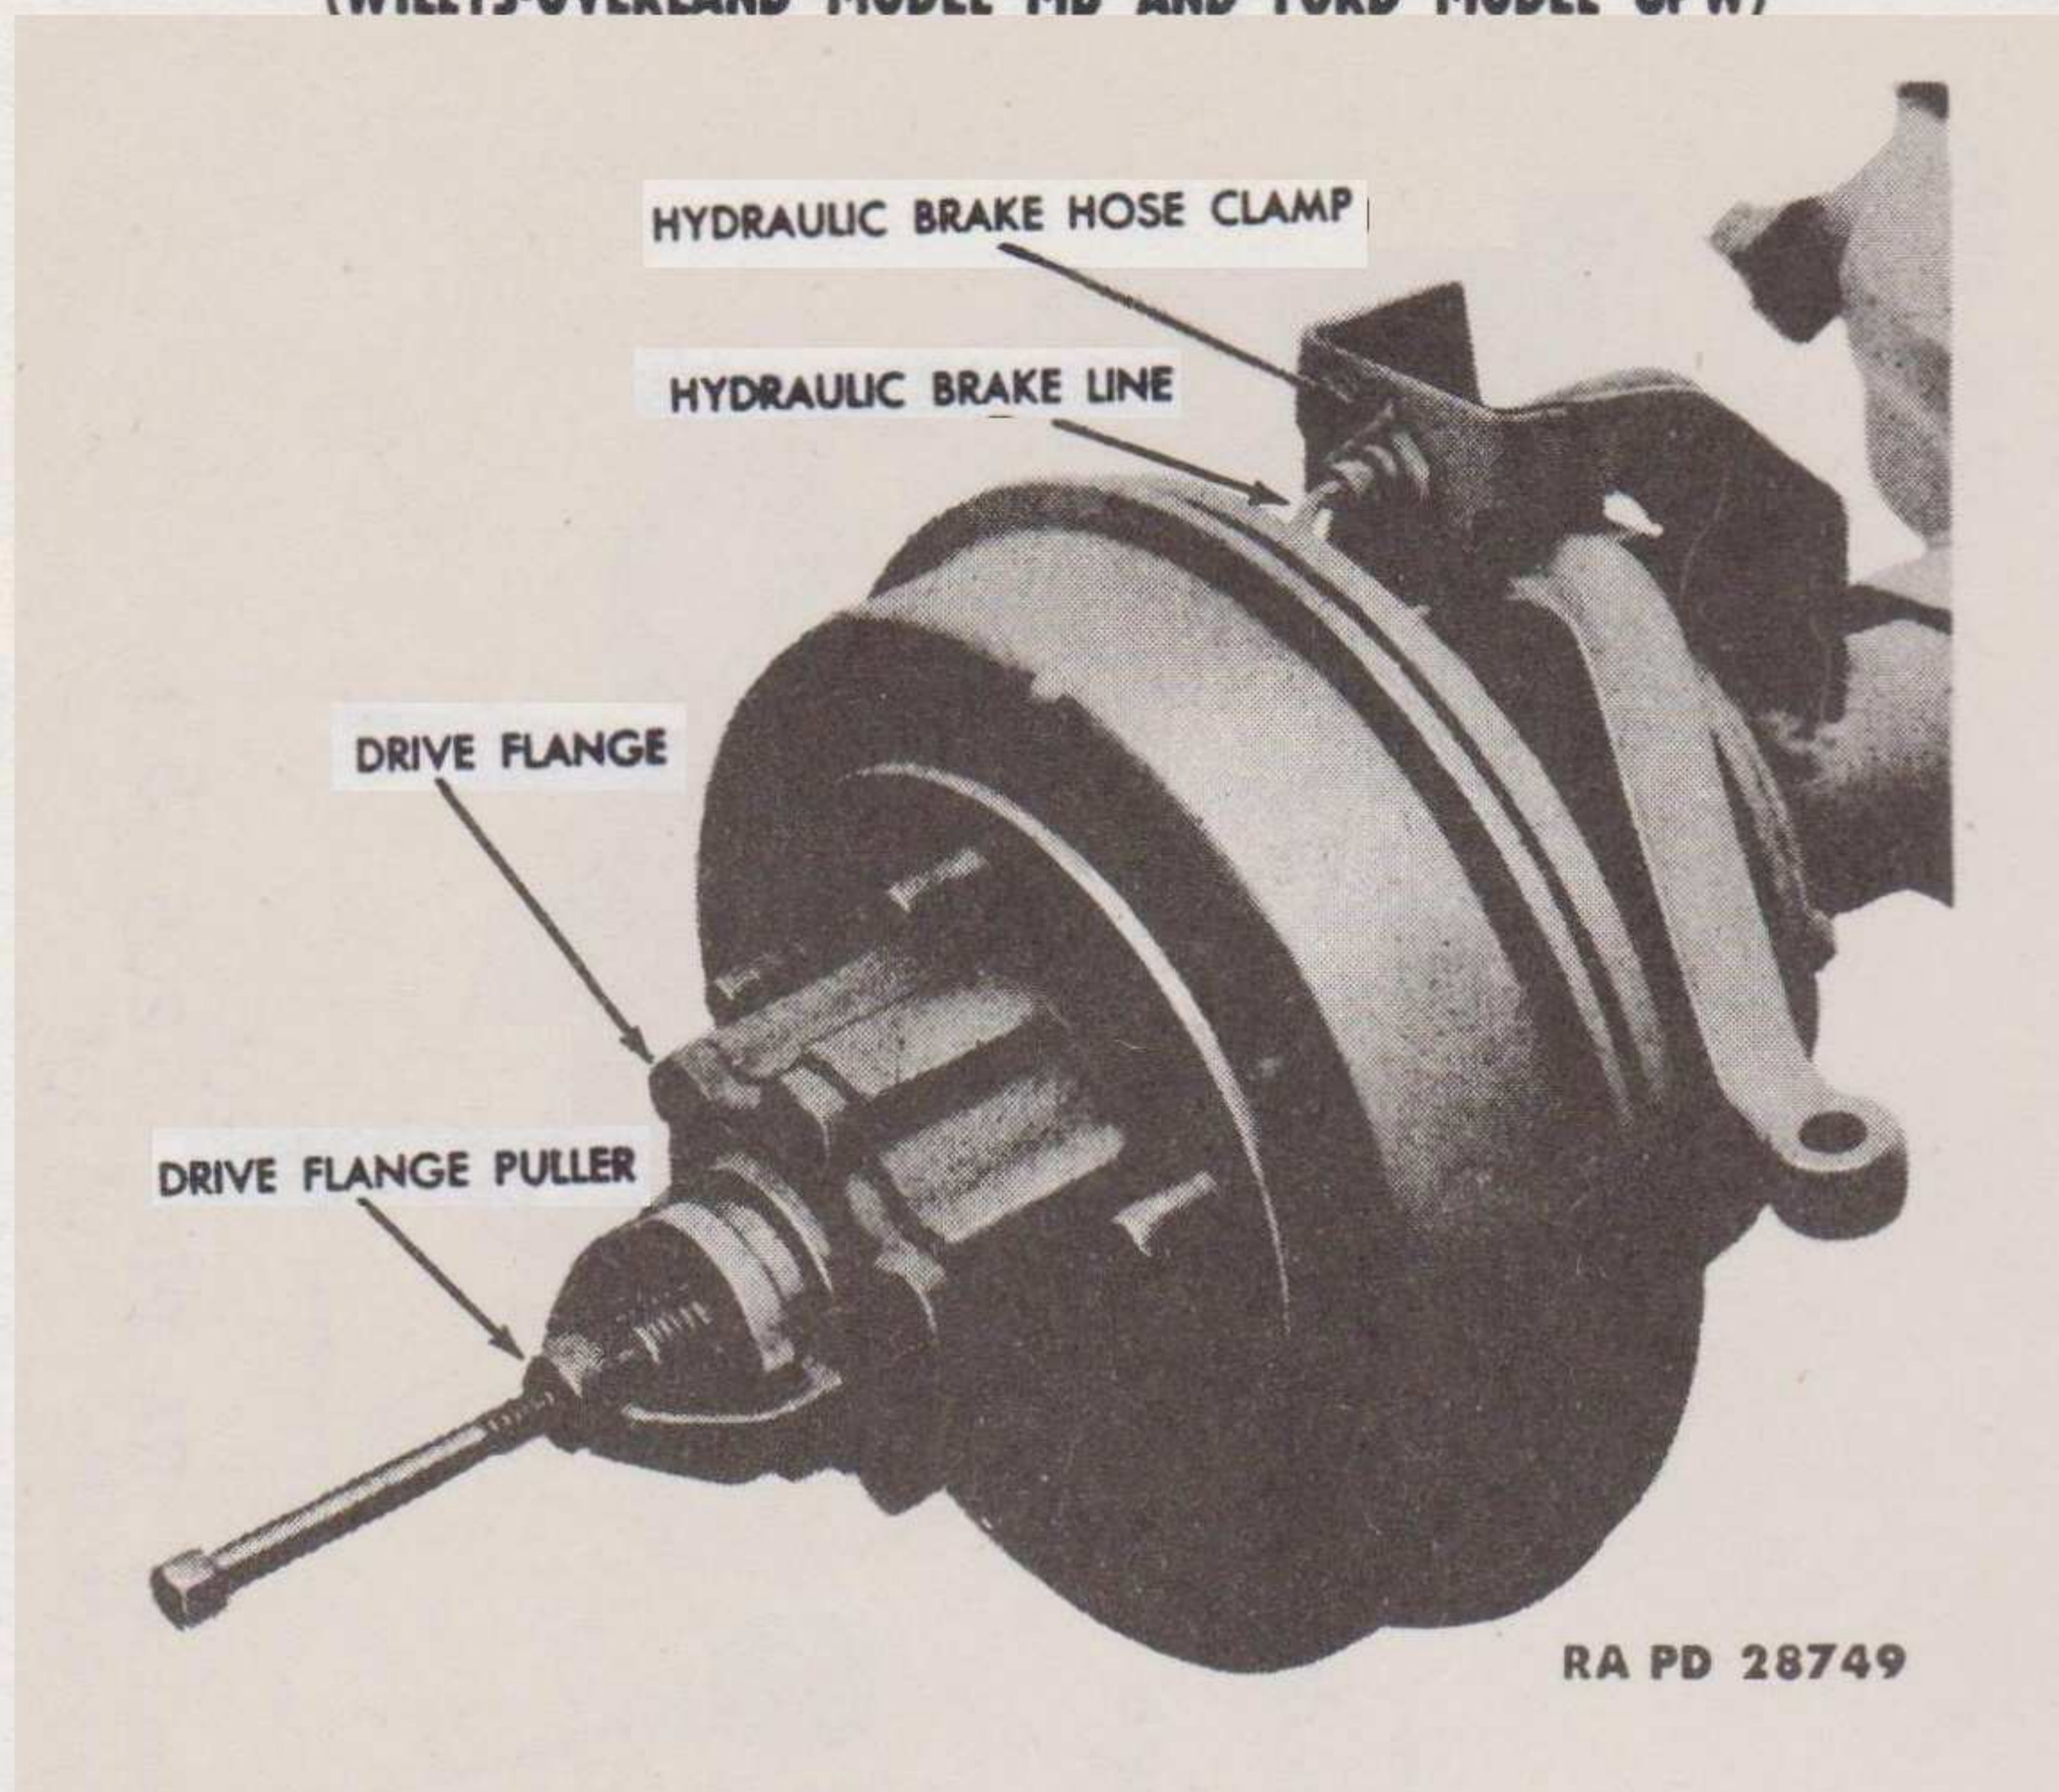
Removing Drive Flange With Puller Similar to Puller 41-P-2912
